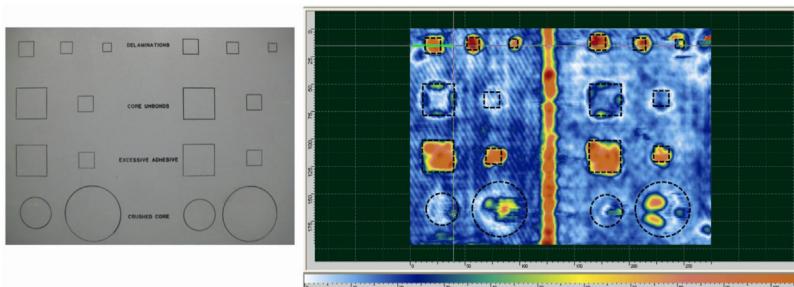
C-Scan imaging for bond testing inspection of defects in aluminum honeycomb/carbon composite structure [29].
